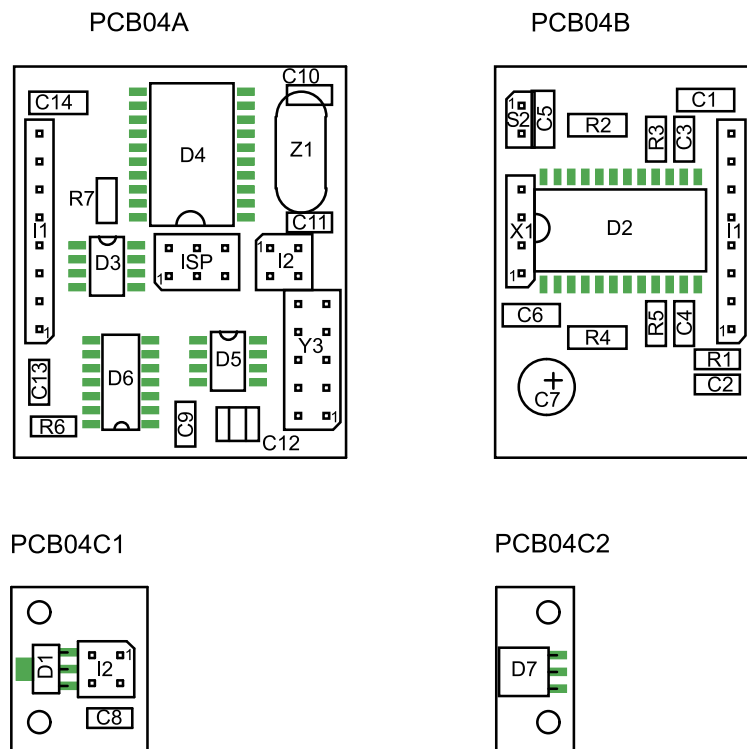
Printed circuit boards for the Stepper motor controller top view. Placement of the components is shown. Designations correspond to circuit diagrams in Fig. 1.13 and Fig. 1.14
